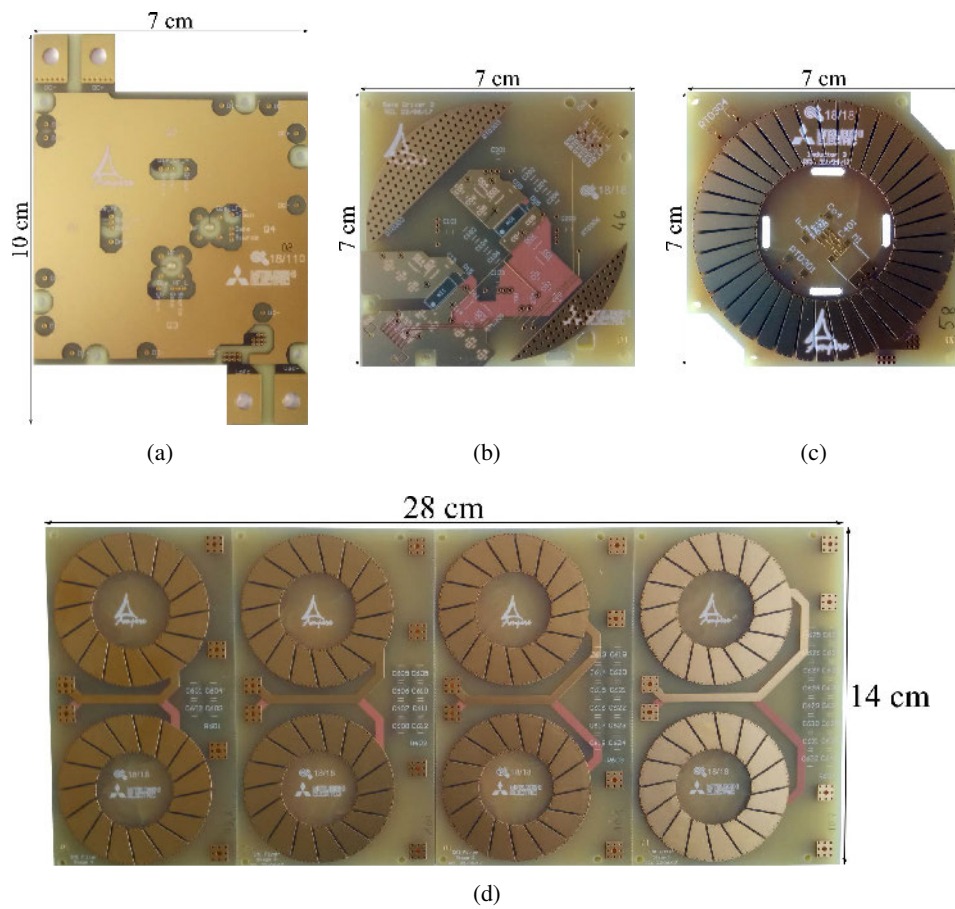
Photograph of the (a) "thin" PCB with 4 embedded dies. (b) "thick" PCB with 2 embedded driver circuits (c) "thick" PCB with 1 "Embedded Toroidal" inductor. (d) "thick" with an embedded DM EMI filter.
